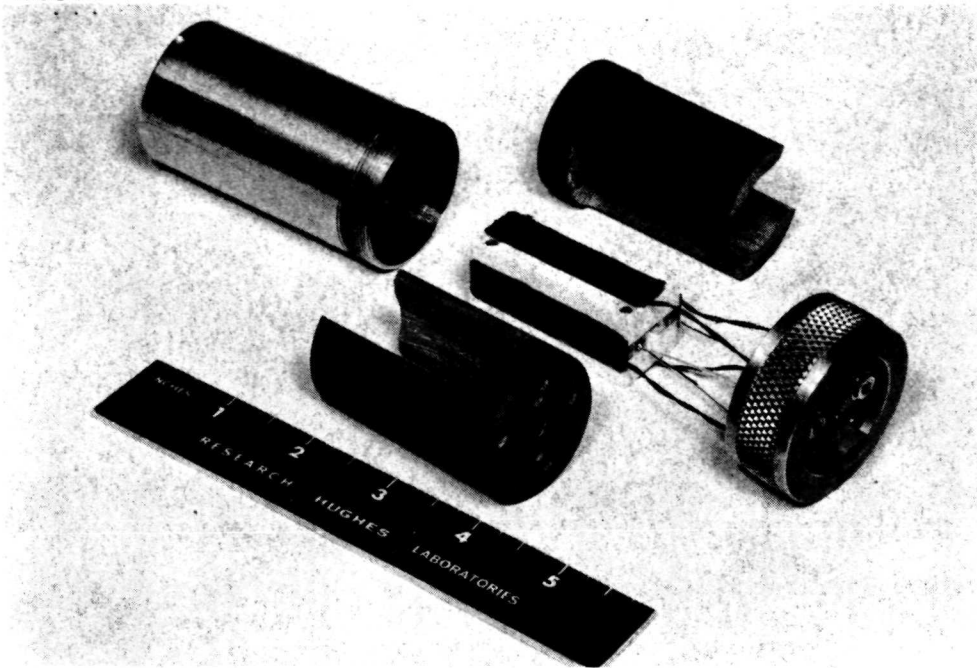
Data Modulator During Assembly Showing Printed Circuit Heating Elements.
